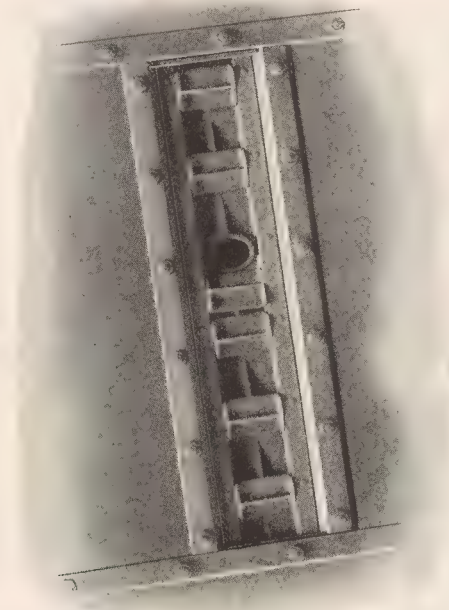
B. & W. Boiler. Dusting Panel—Patented.
